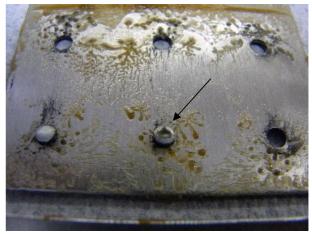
LPS-3 treated specimen tested at 9kN with rivet head failure. Refer to Fig. 7(b) for the overall view of the joint.
